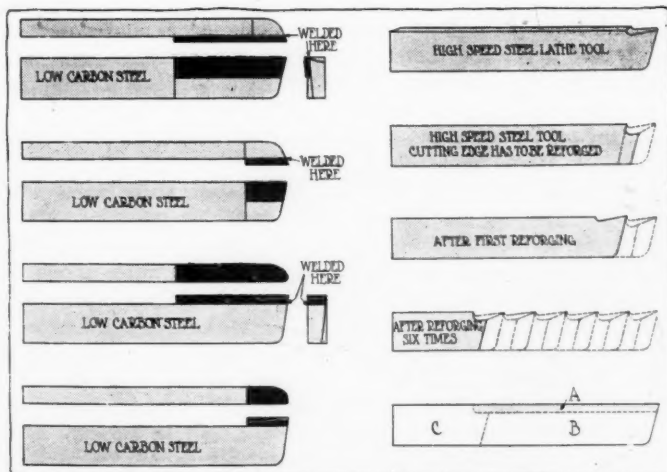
Left—Tools made by welding high speed steel to low carbon shank. Right—Tool made of high speed steel. A—Cutting edge. B—High speed steel taken off in re-forging and grinding. C—Tool is too short and almost always scrapped.
